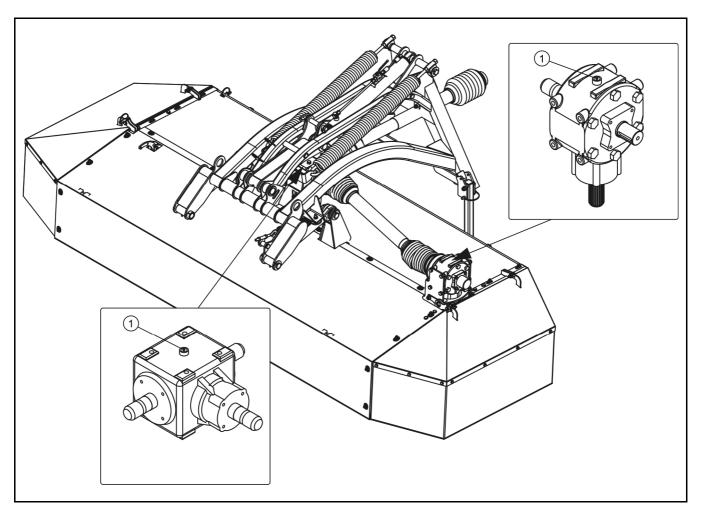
A Location and inspection points of intersecting axis gears
